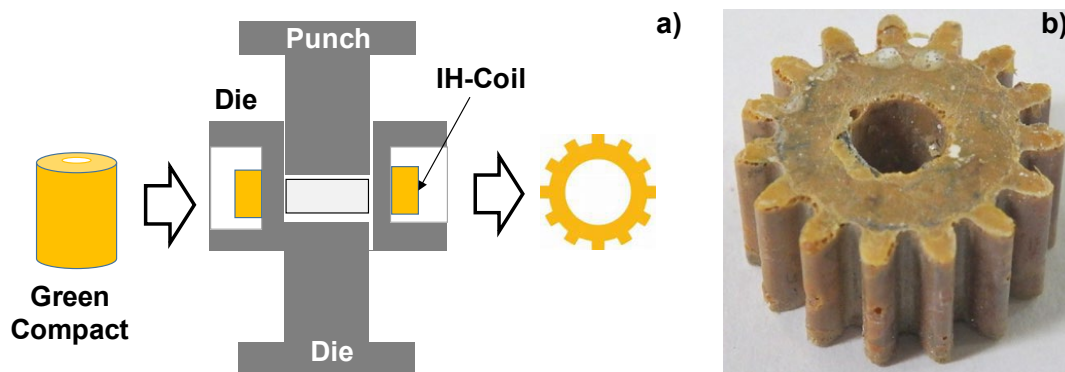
Hot forging of the preform to gear-shaped intermediates. a) Schematic view on the die-set for hot forging, and b) a gear-shaped product intermediate.
